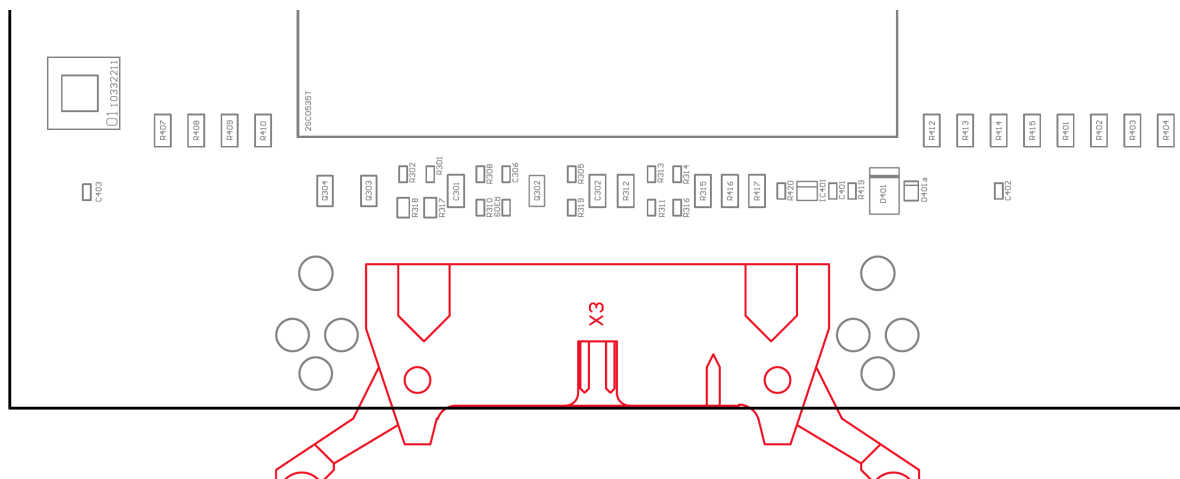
Assembly drawing of primary side of the 2BB0535T with electrical interface X3
